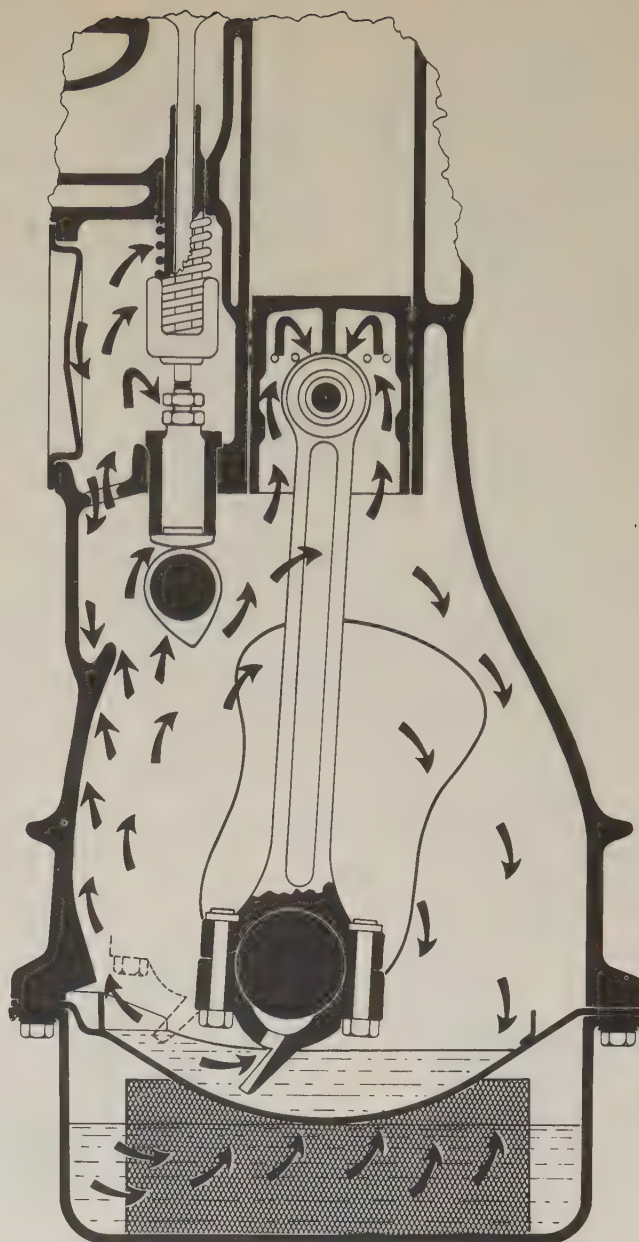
Splash lubricating system on an L-head engine. The dipper on the connecting rod splashes oil, as shown by the arrows, every time the piston passes through BDC.
